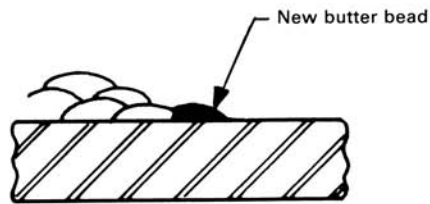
WELDING TECHNIQUES FOR IMPROPER TEMPER BEAD SPACING
